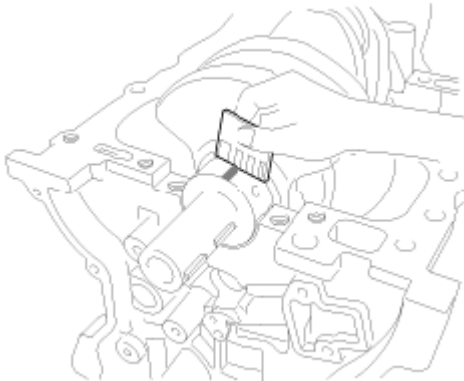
Measuring Crankshaft Bearing Oil Clearance
